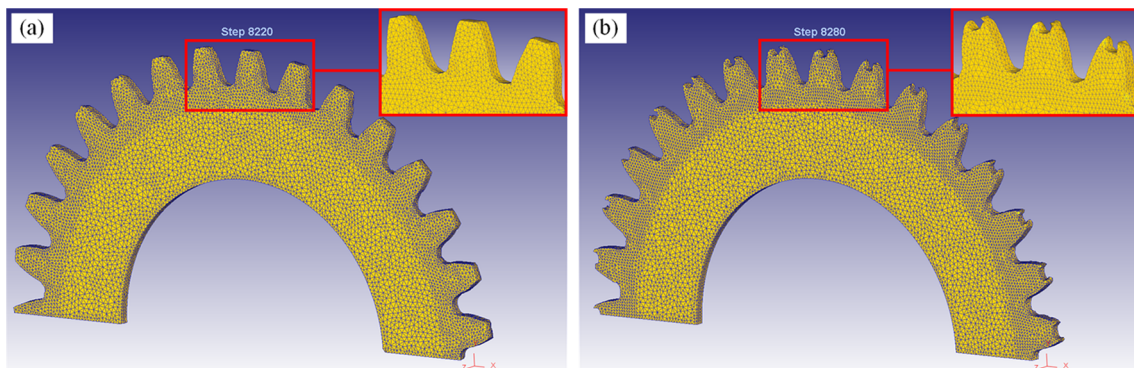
Tooth morphology at the end of tooth forming stage using a revised rollers and b unrevised rollers
